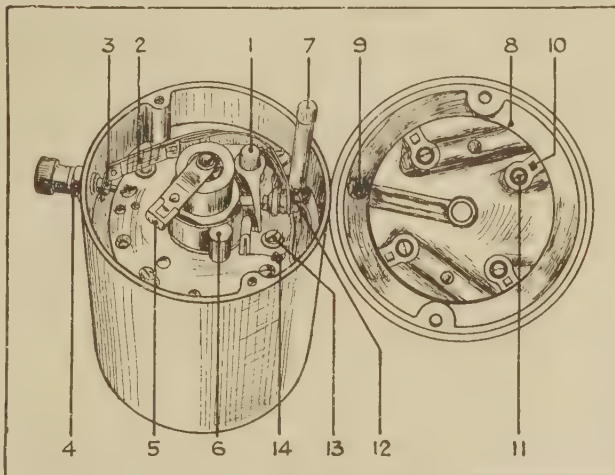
Scintilla Vertex Magneto Contact-breaker Assembly.
